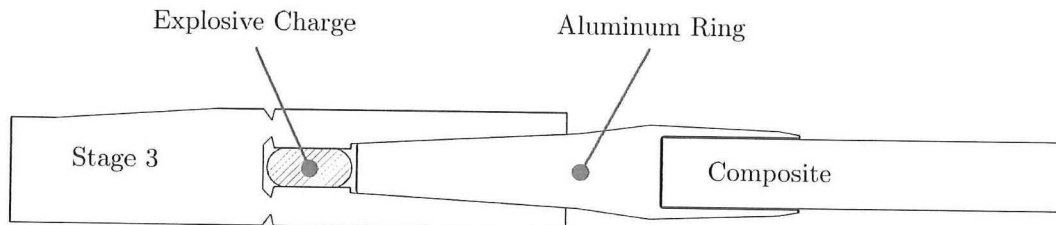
Cross-sectional drawing of the separation ring assembly
